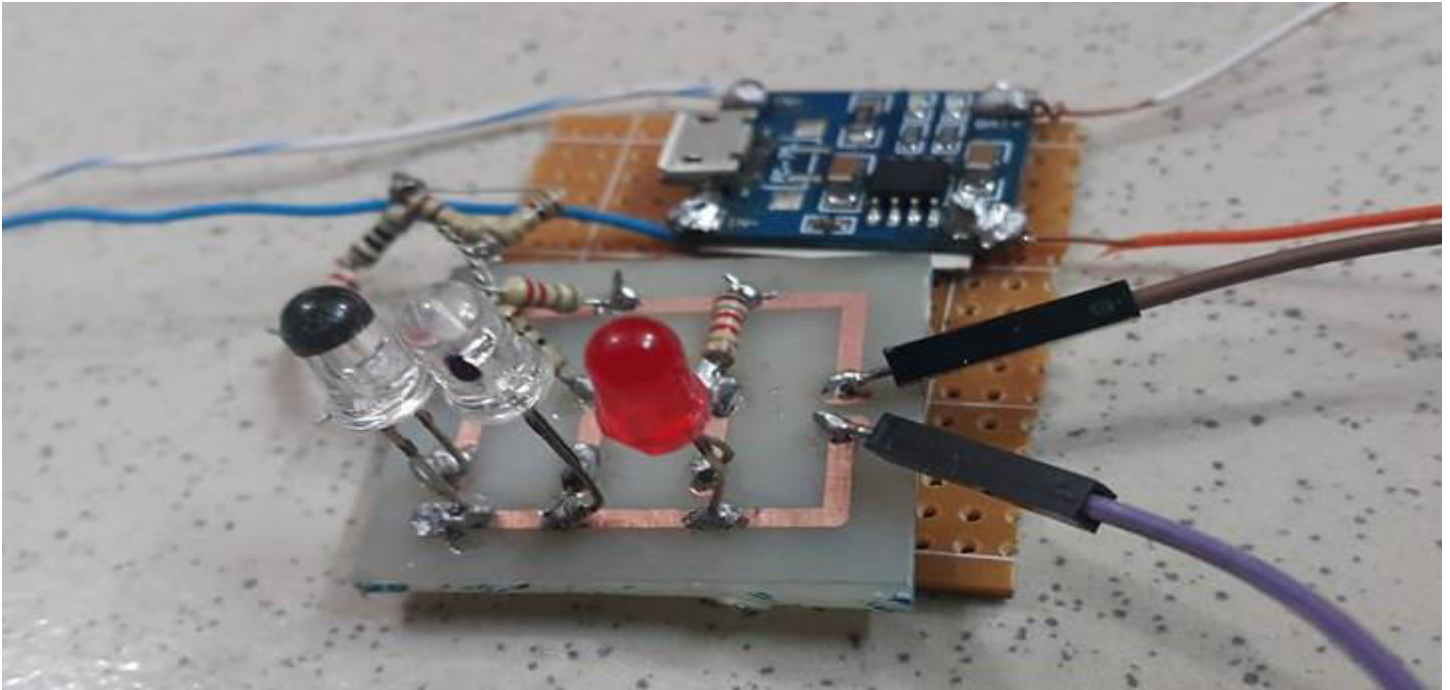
PCB of battery level indicator and TP 4506 Module
